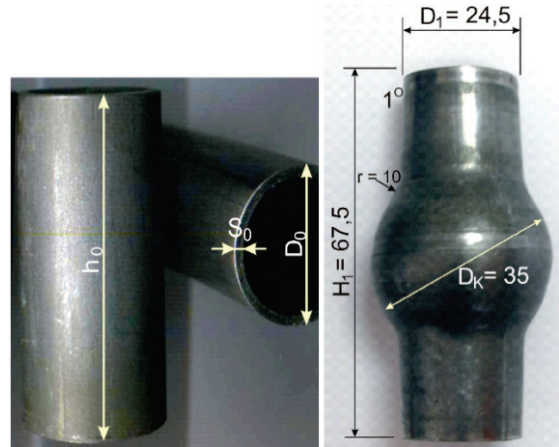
Geometrical characteristics of tubular billet and final workpiece [6, 7]
